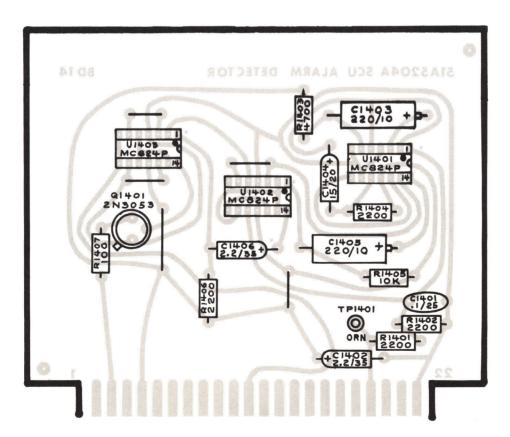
SCU Alarm Detector (Board 14), Parts Location
